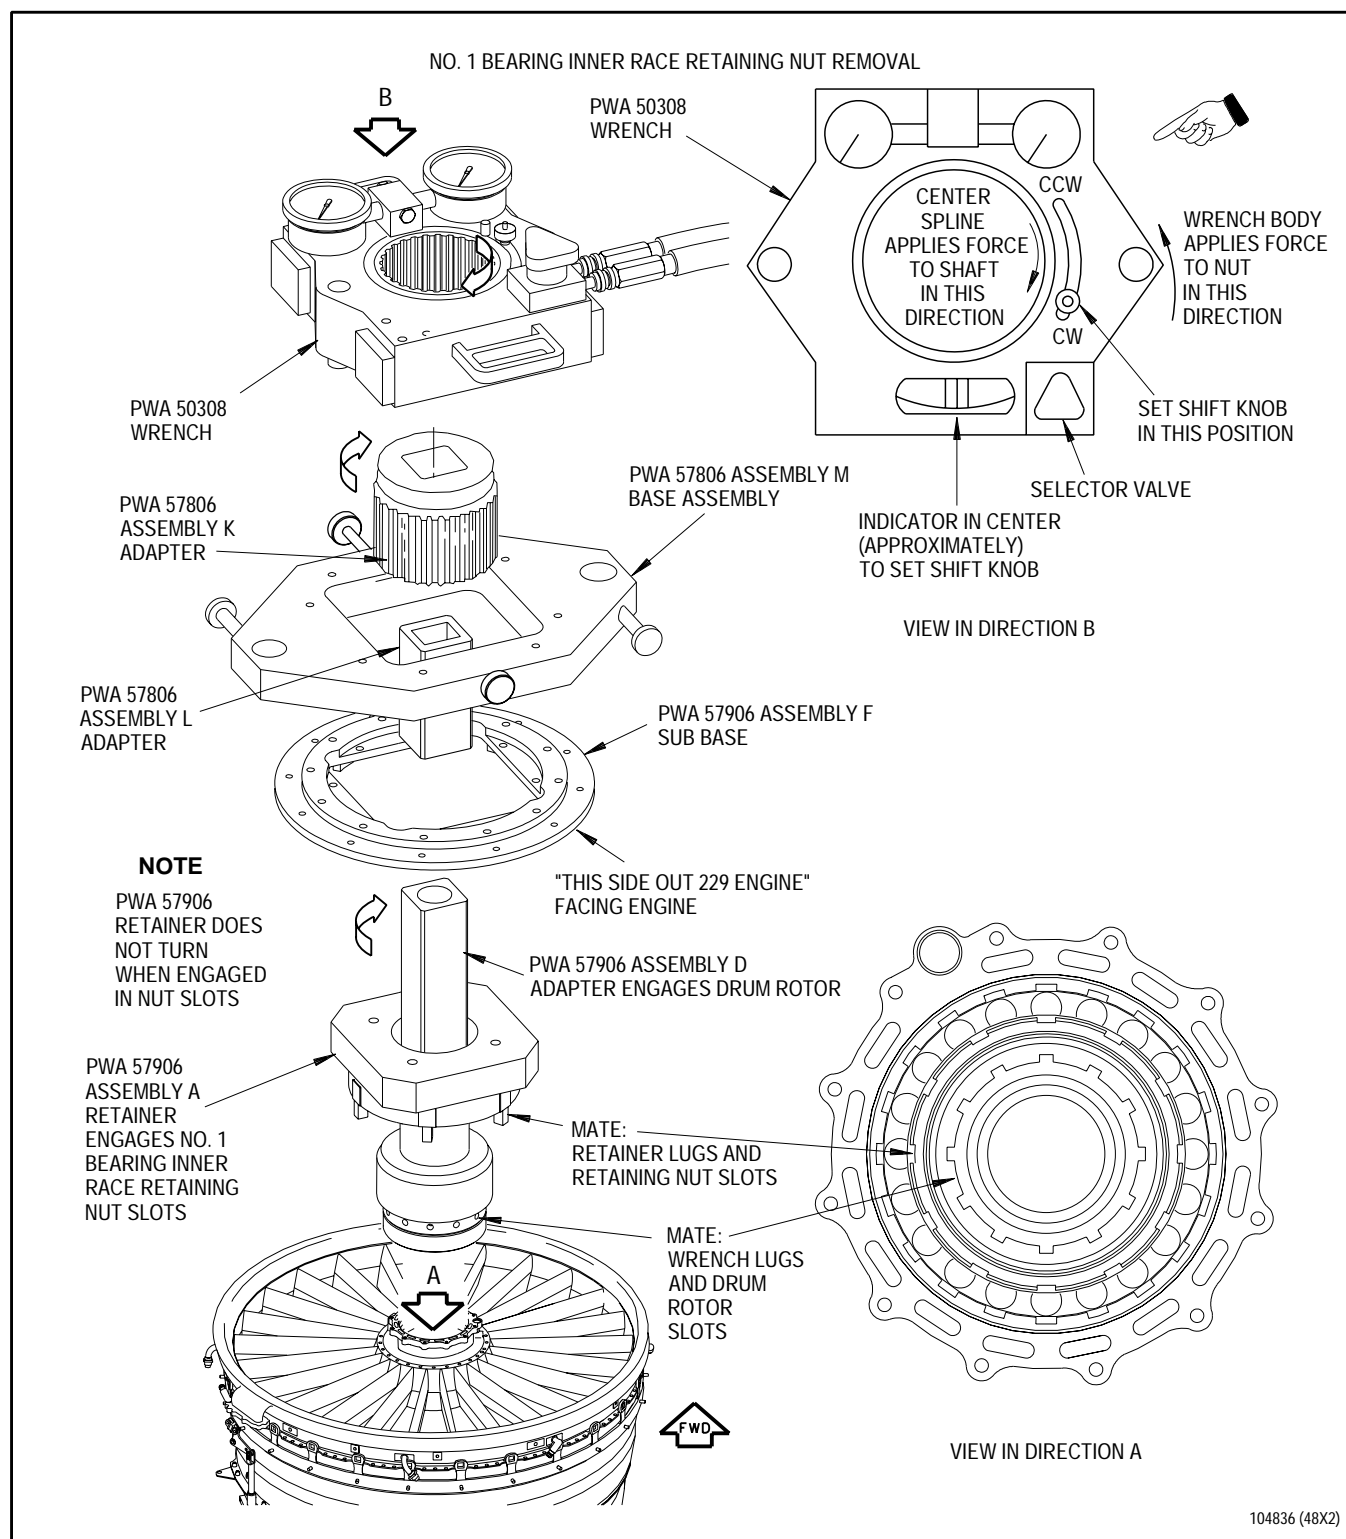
B. No. 1 Bearing Inner And Outer Race Retaining Nuts - Removal (Sheet 1 of 2)
